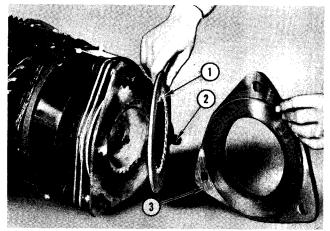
REMOVING BRAKE PLATE AND DISCS 1. Discs 2. Stud 3. Brake Plate
